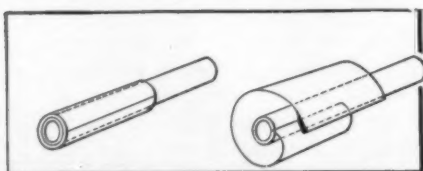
Method of making a lapping tool from a piece of steel tube and emery paper
